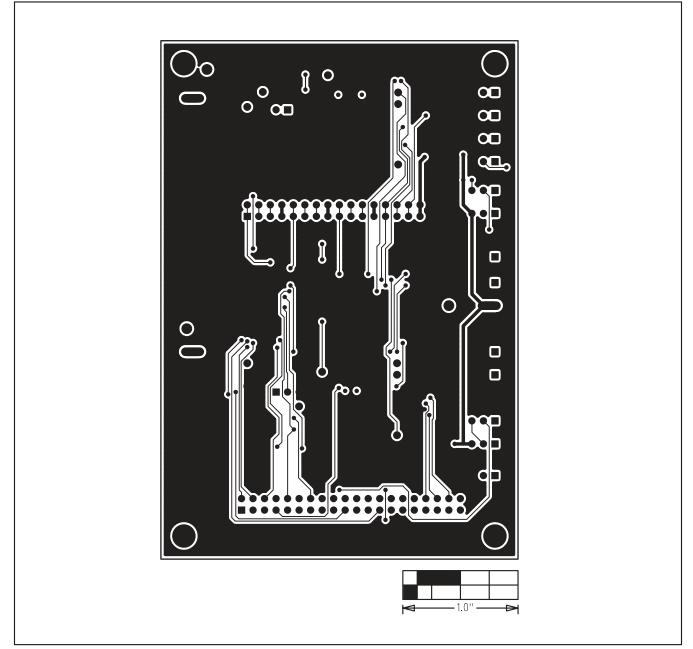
MAX16050 EV Kit PCB Layout—Solder Side
